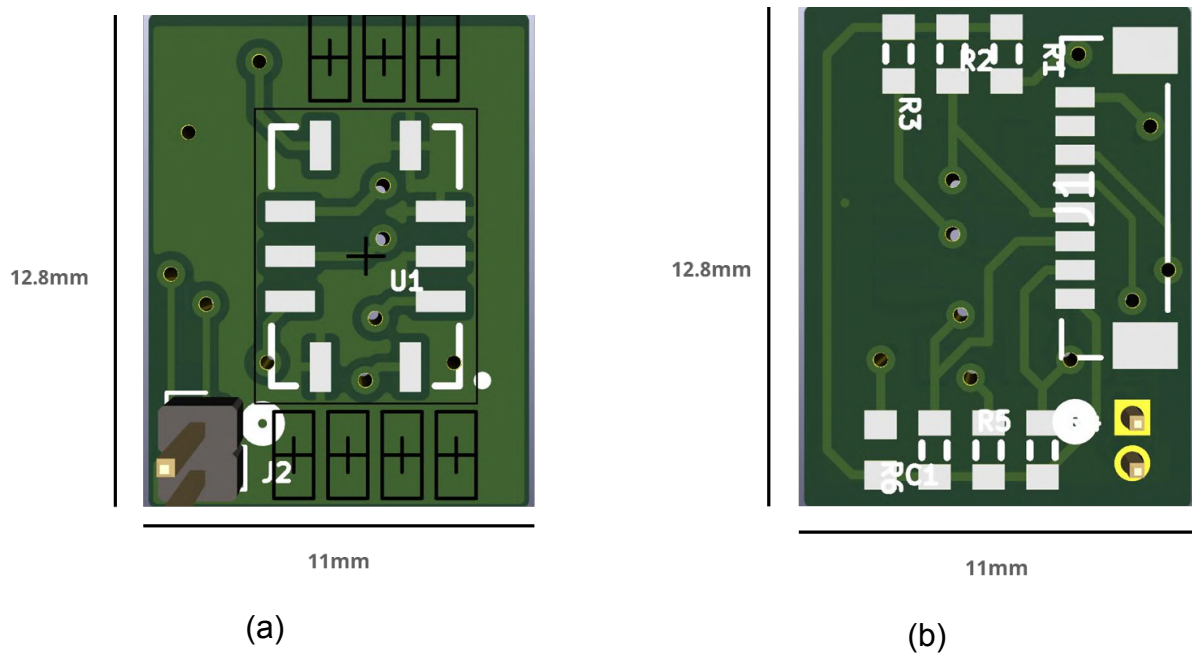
(a) Top view of the PCB, (b) Bottom view of the PCB
